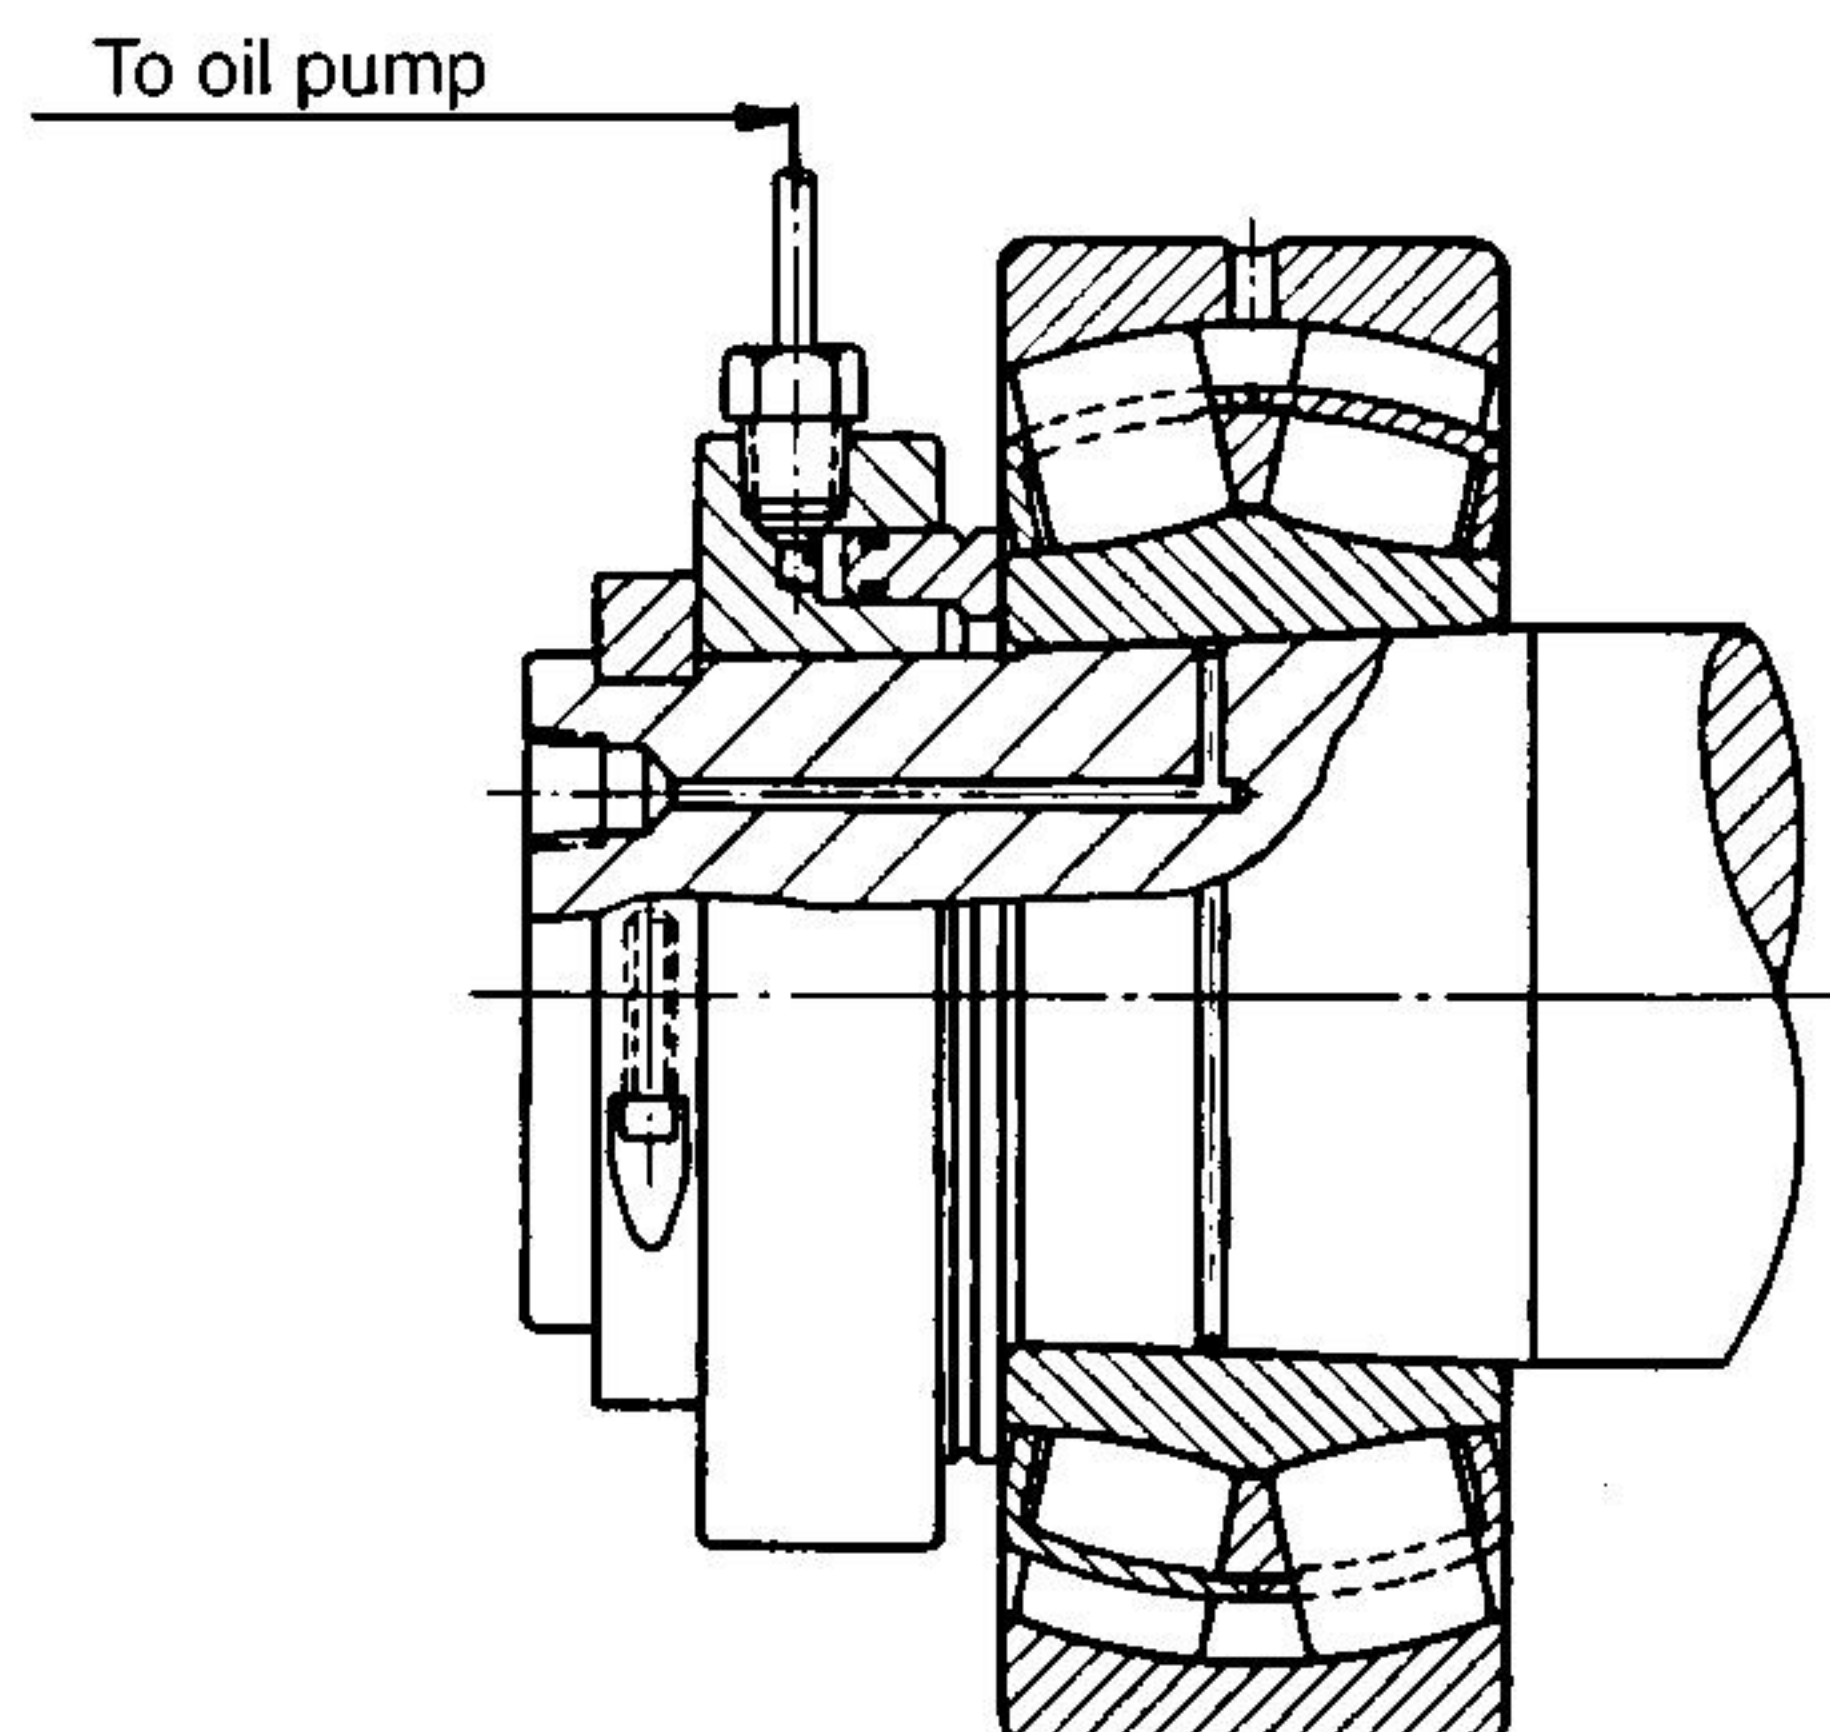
Use of a hydraulic nut to mount a spherical roller bearing.
